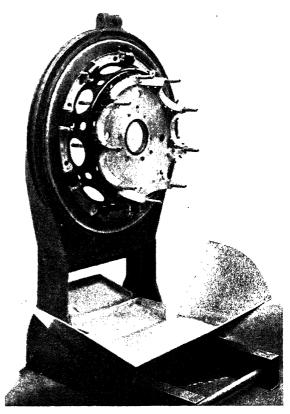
Showing rear half crankcase assembled to CONE MOUNTING WITH FLEXIBLE RUBBER MOUNTING UNITS IN POSITION.
